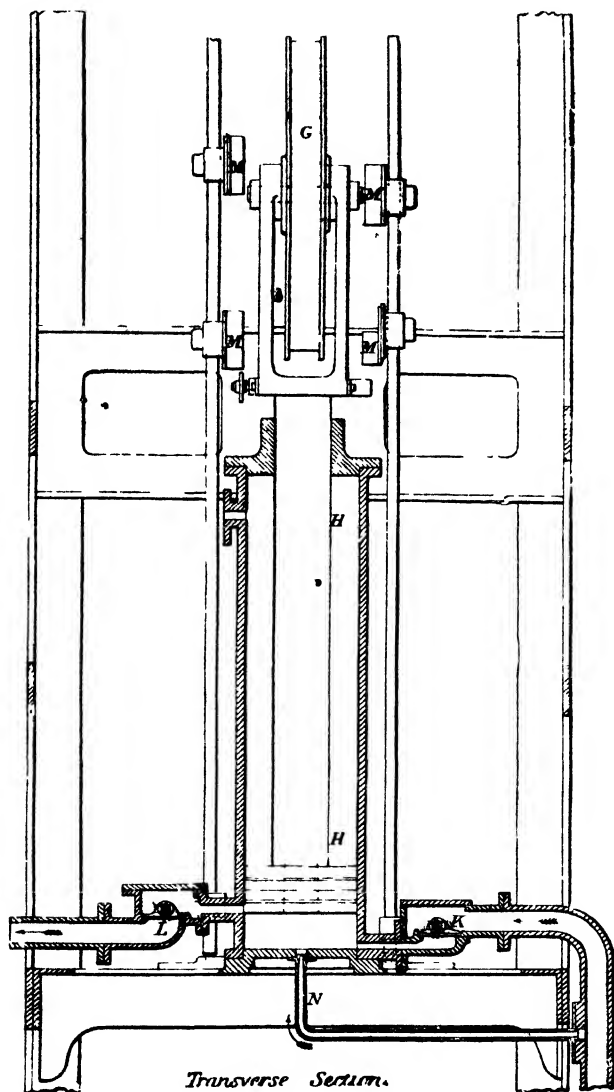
MATHER & PLATT LARGE BORING MACHINE.
